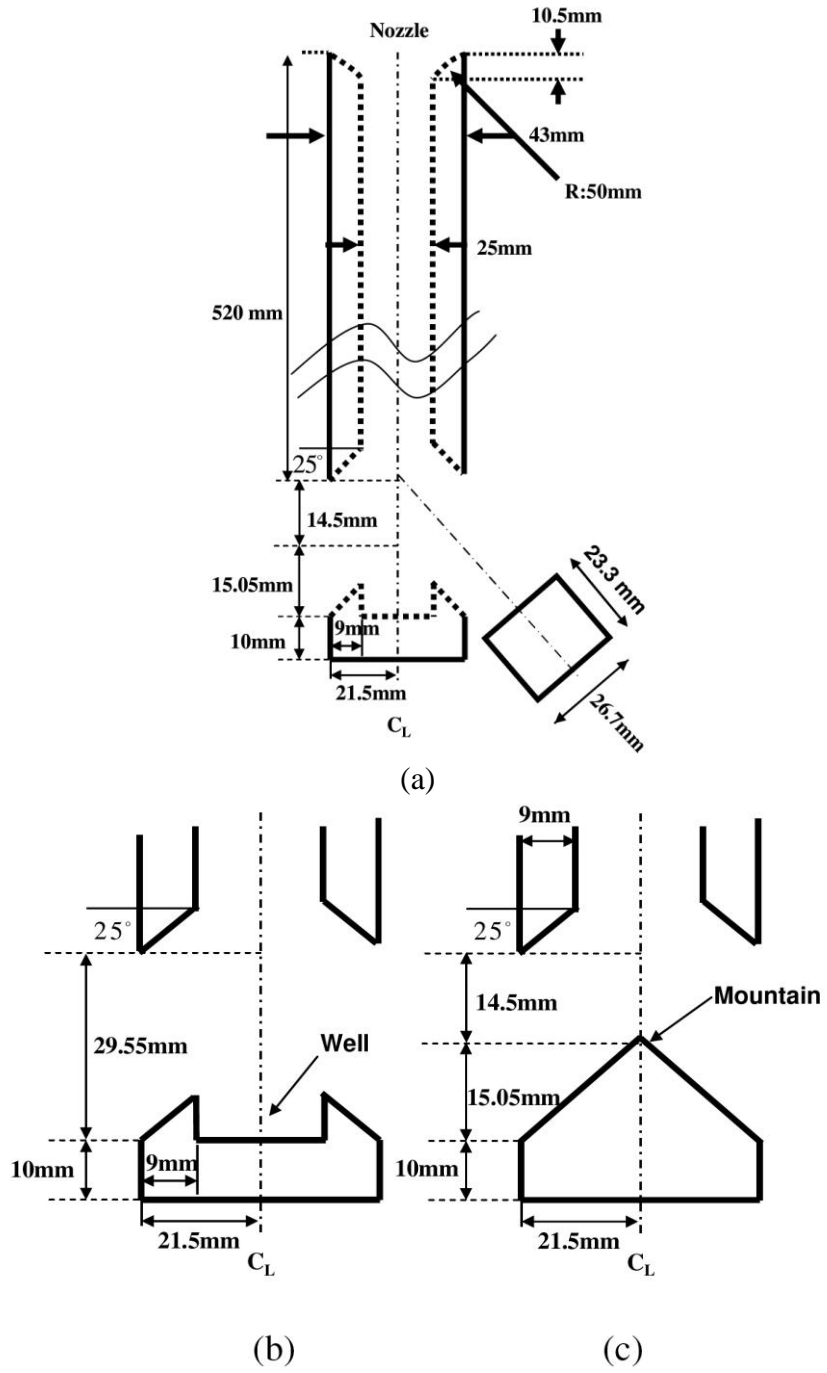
Geometry of (a) nozzle and close-up of: (b) well-bottom and (c) mountain-bottom shapes
